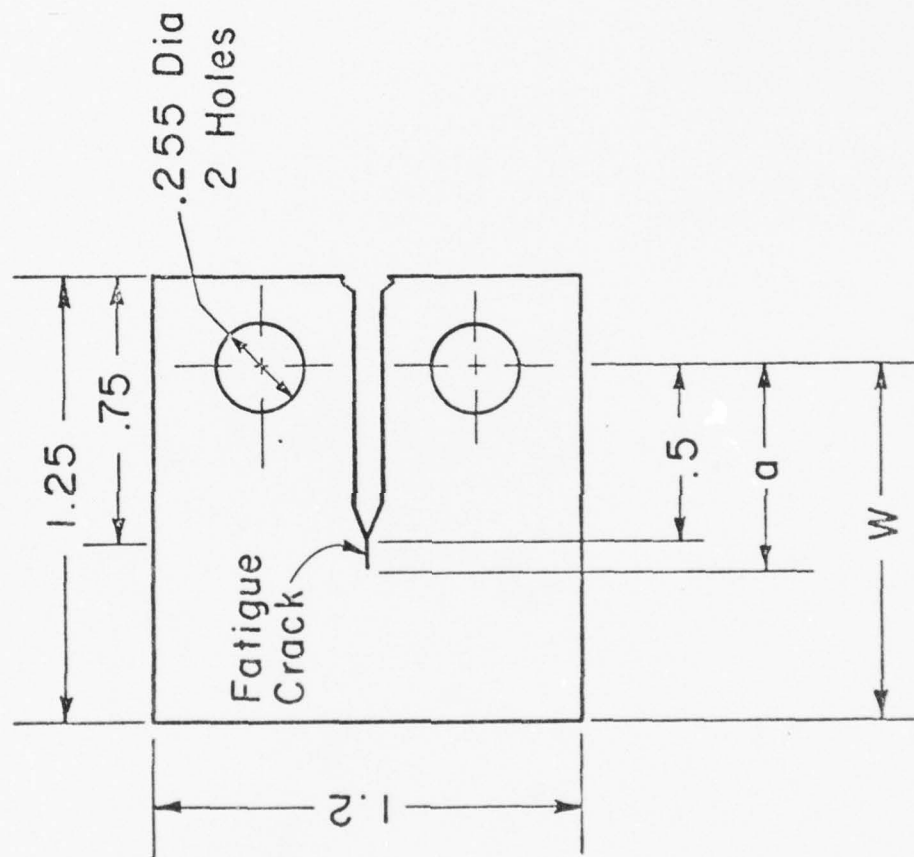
Compact Fracture Toughness Specimen - Dimensions in Inches. The thickness varied from .04 to .18 in.
